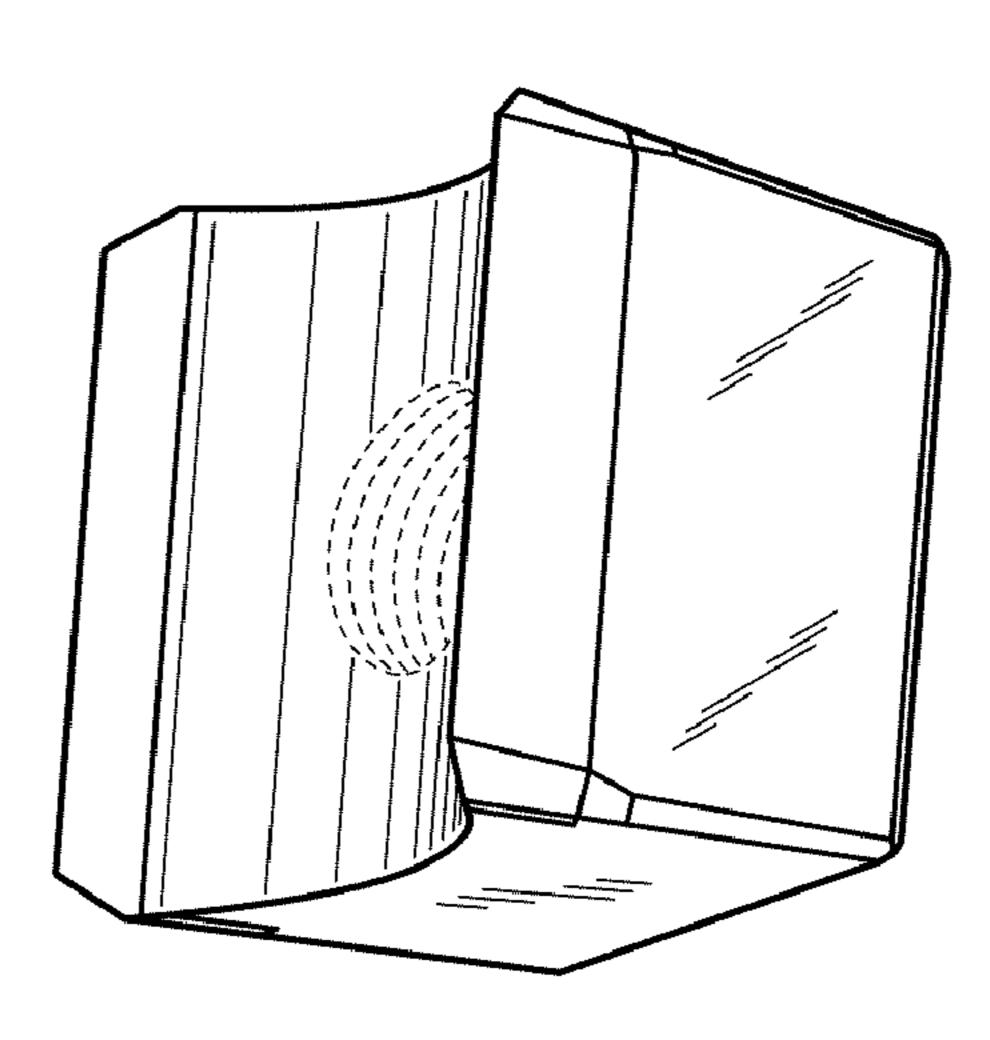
is a perspective view of a tooth for a circular saw or a mower drum according to a second embodiment of the present design;
